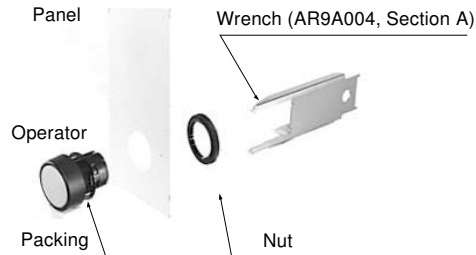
Mounting an operator in a 22.3mm-dia. hole
